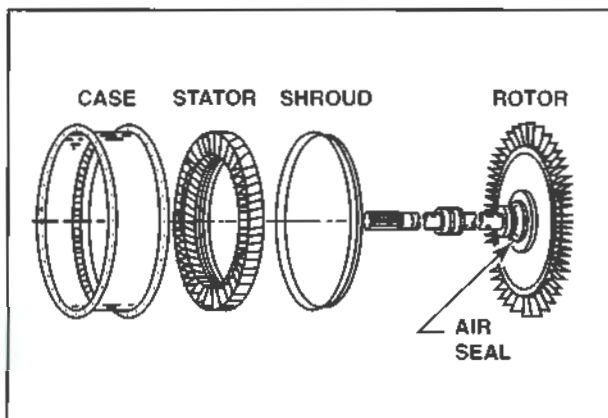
The four basic elements of the turbine assembly in a gas turbine engine are the case, stator, shroud, and rotor.
